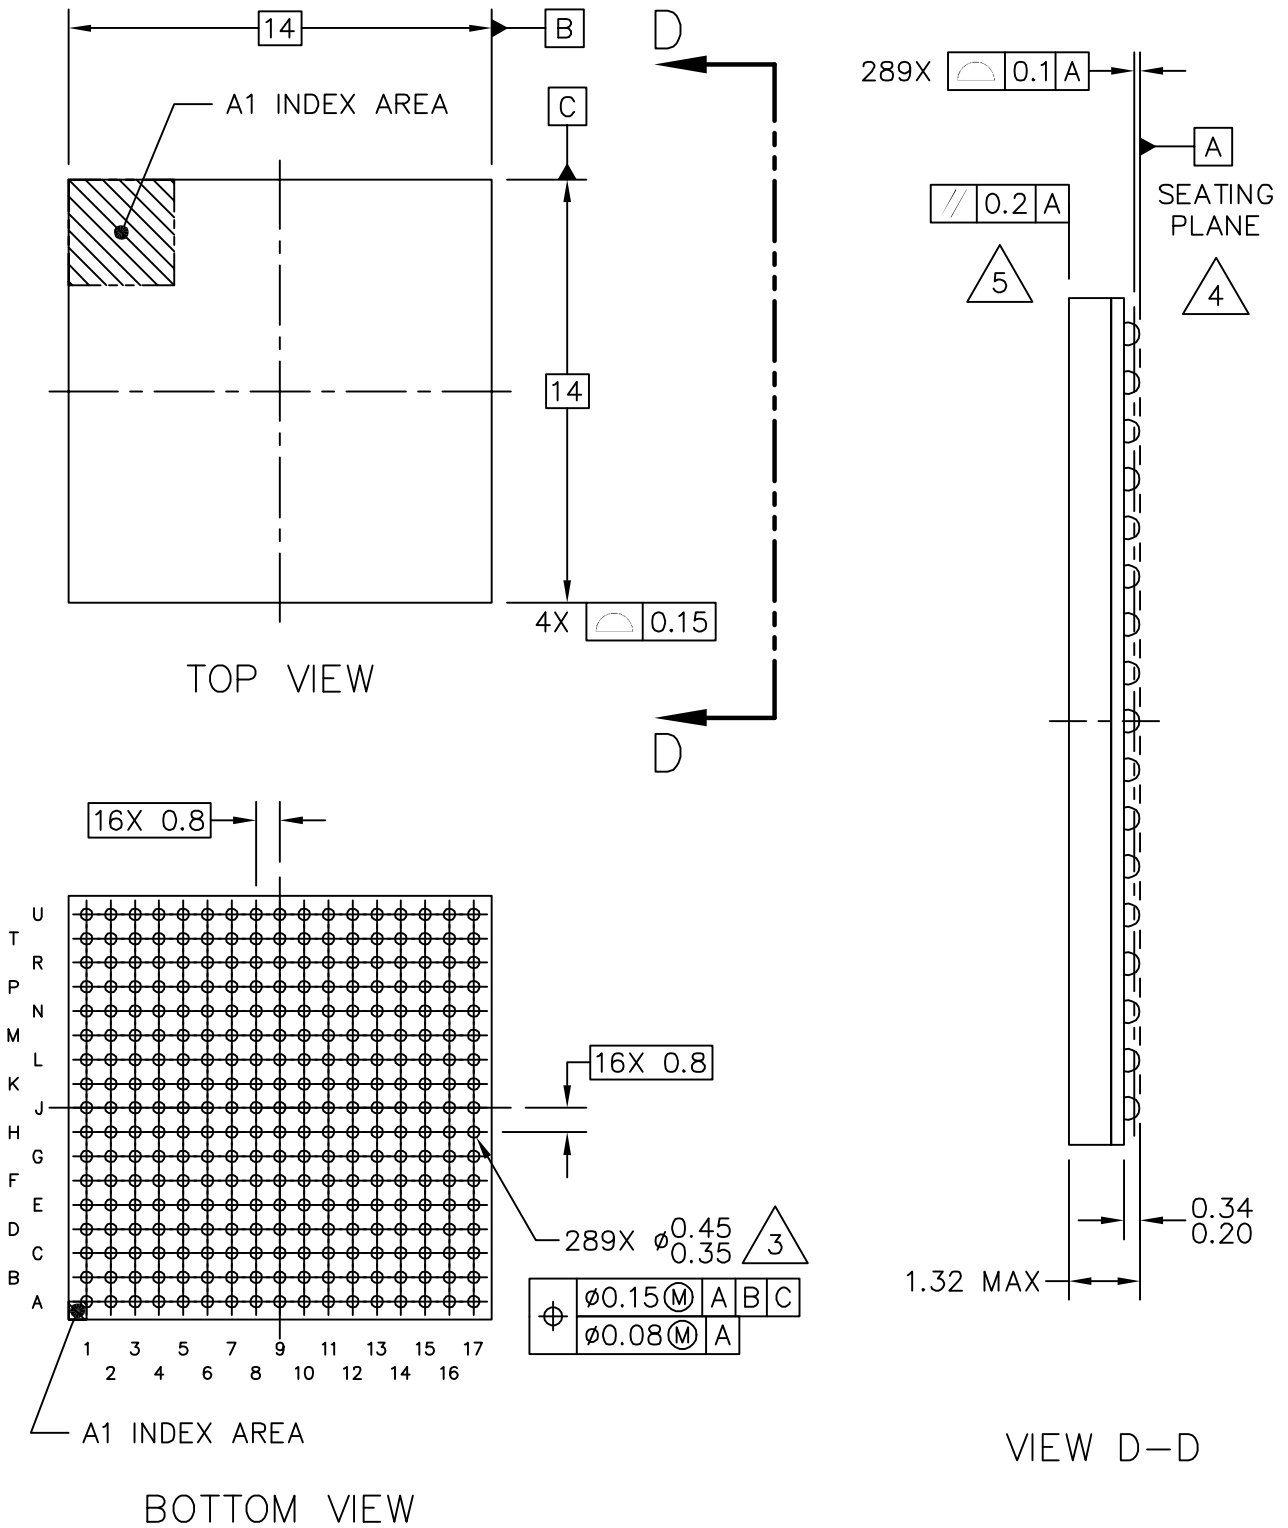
14x14 mm BGA, Case x Package Top, Bottom, and Side Views
